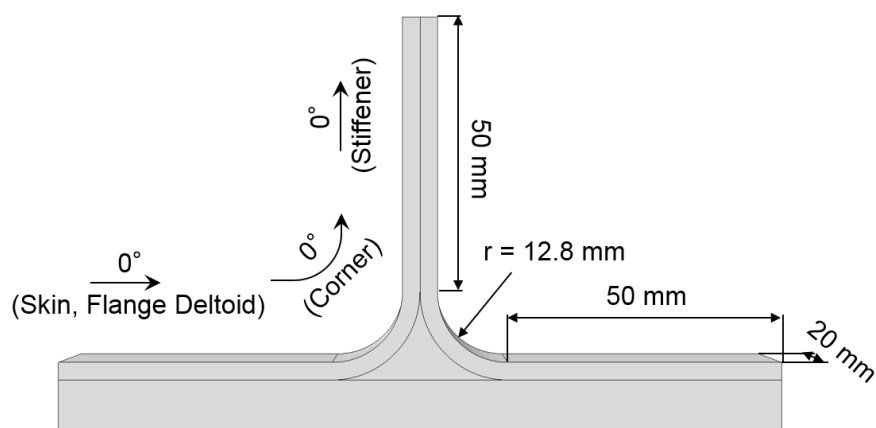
Schematic of specimen used in tensile tests in section 1.6.
